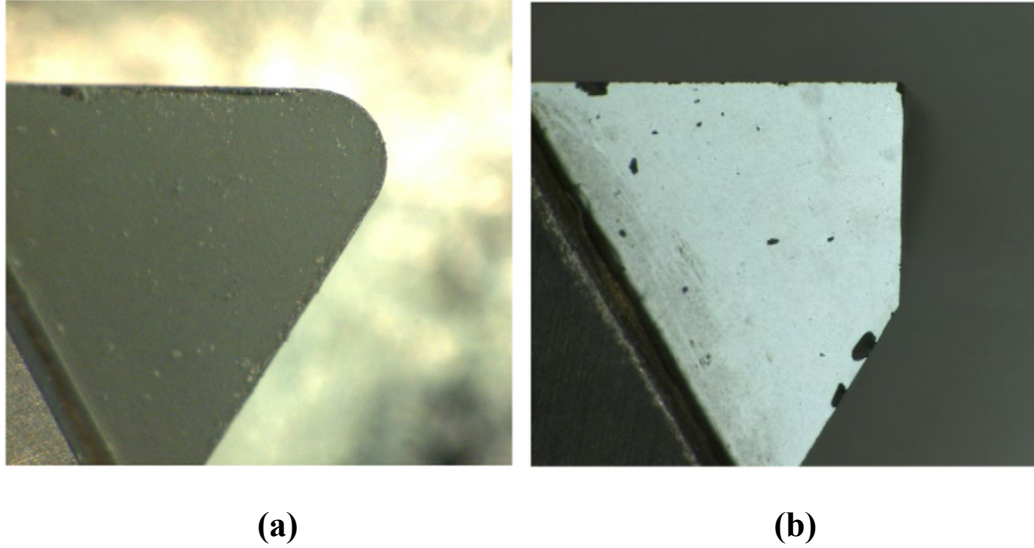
(a) commercial PCD tool, (b) and in-situ modified PCD tool by micro-EDM
